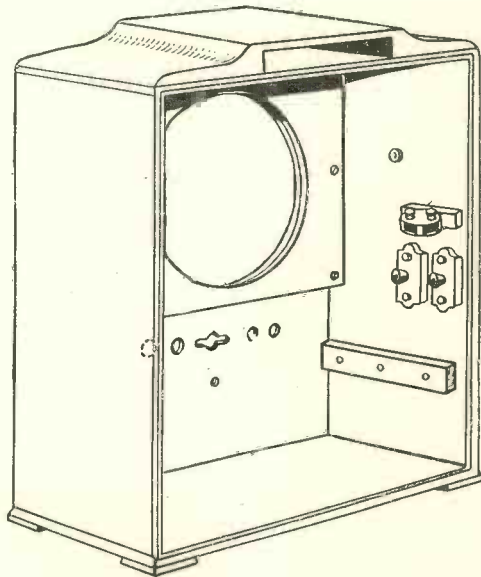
FITTING THE BEARINGS FOR THE BASEBOARD.
